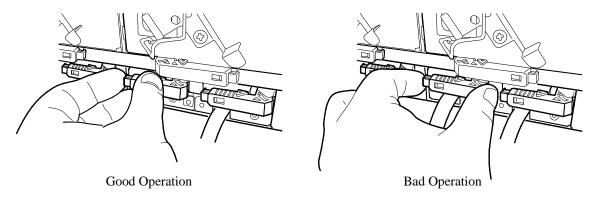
Cable Holder Button (blue) Operation
